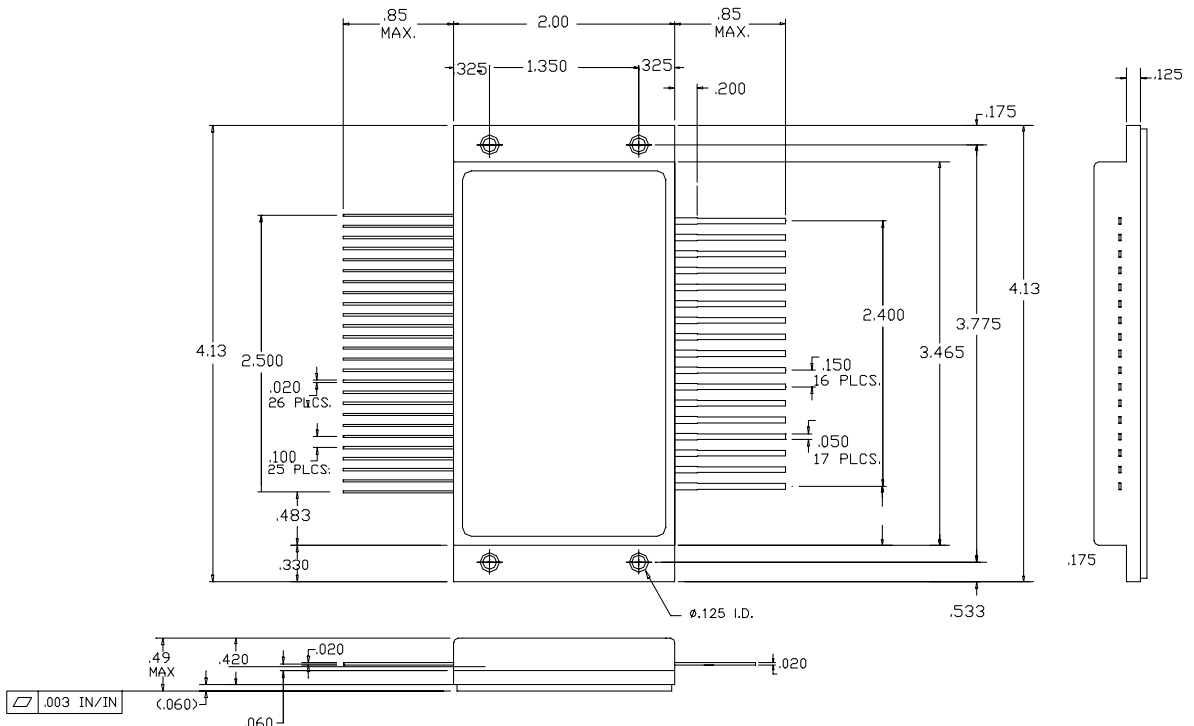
Mechanical Outline MP3-43L Plastic Ring Frame Package
